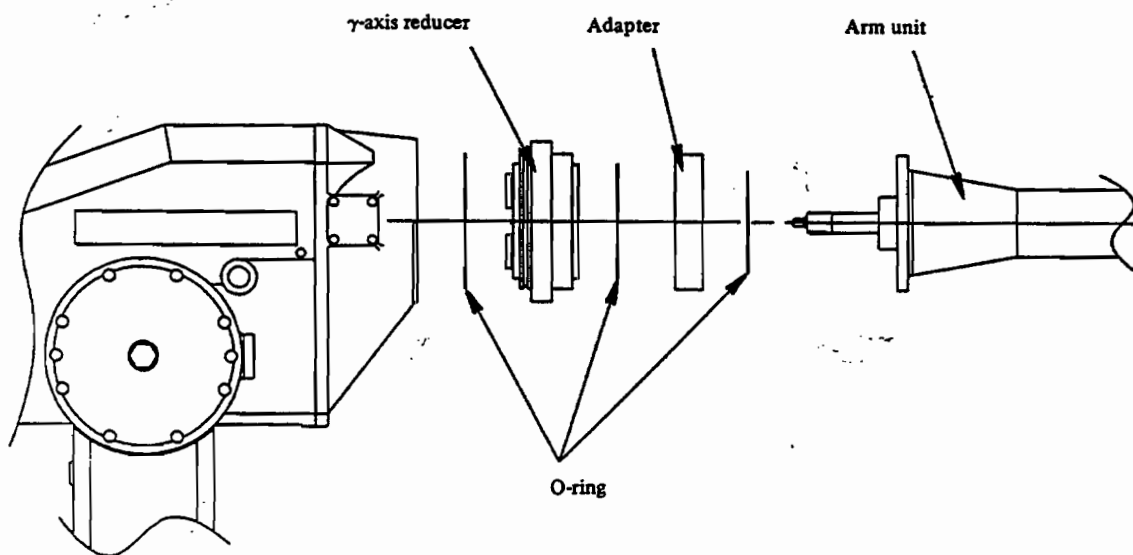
(b) Replacing γ -axis reducer (S-700)
